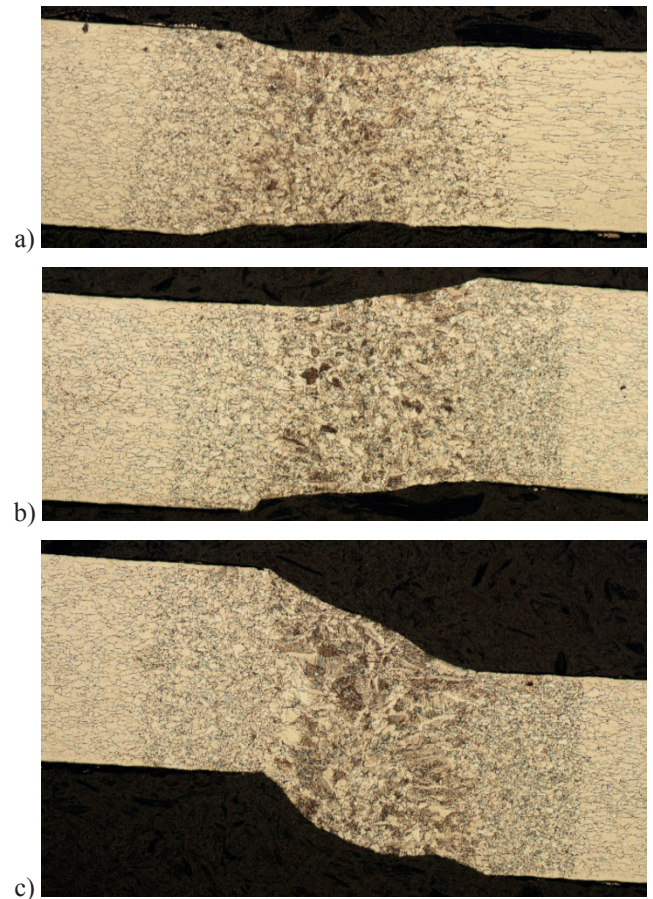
Macrographs of butt joints of 0.8 mm thick electro-galvanized steel sheet DC04, autogenously welded by a disk laser (Table 4); a) J1, b) J2, c) J3
